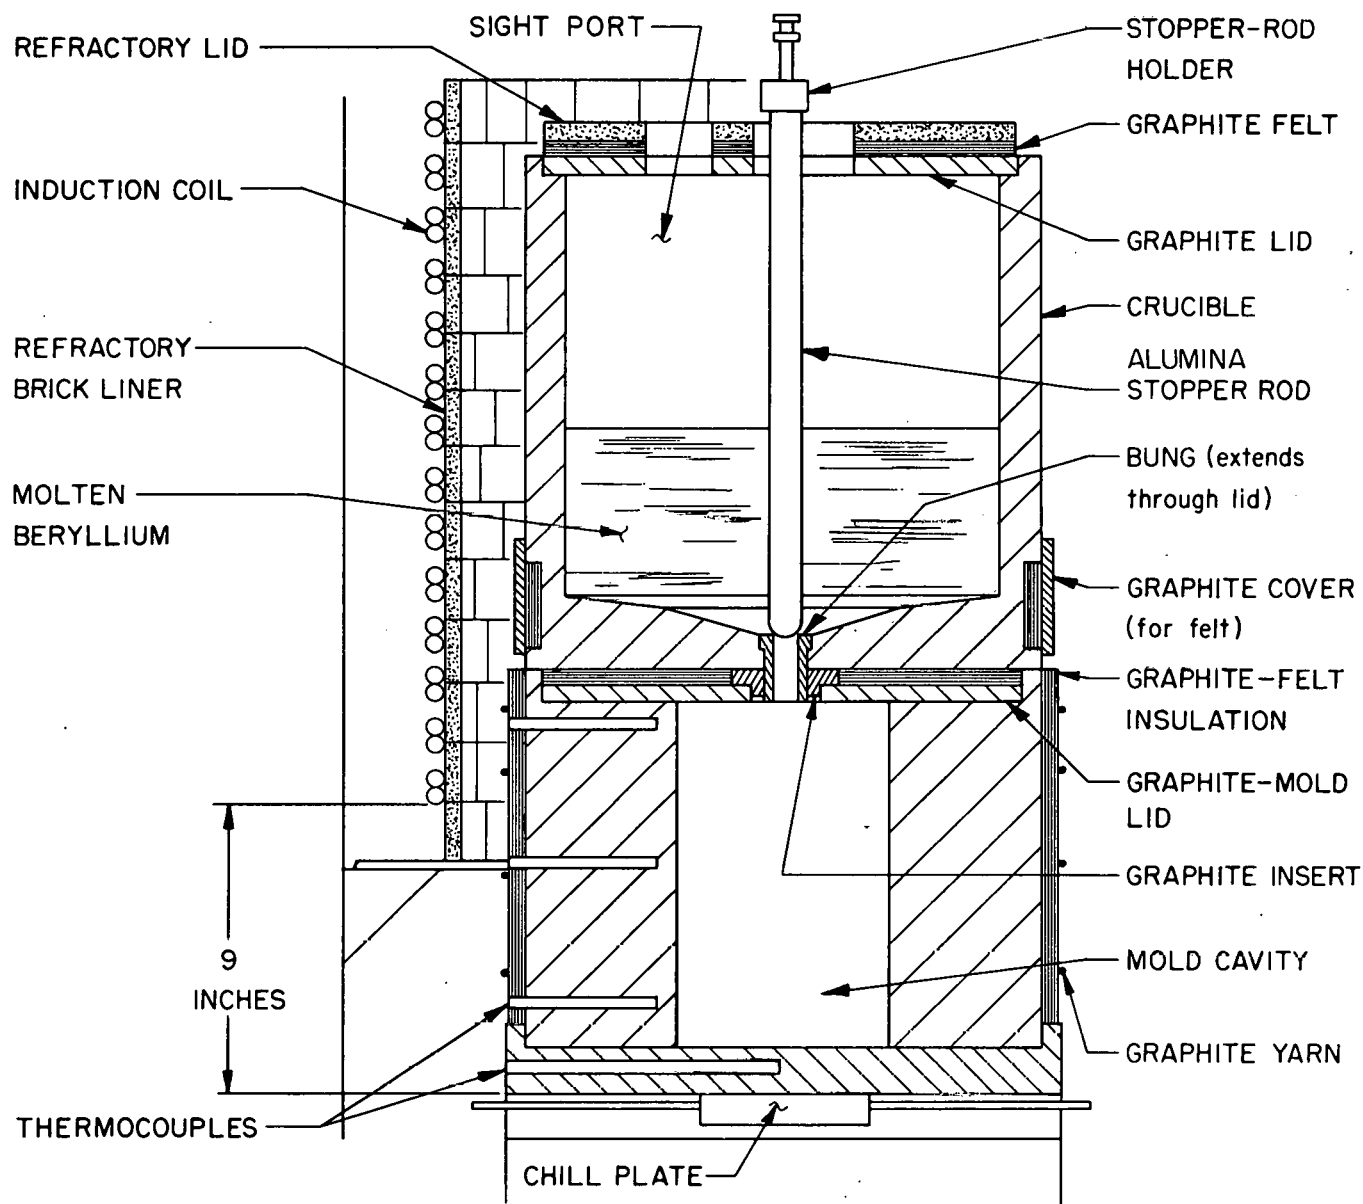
Cross-sectional view of the mold-crucible arrangement used to cast large, rectangular beryllium ingots.
